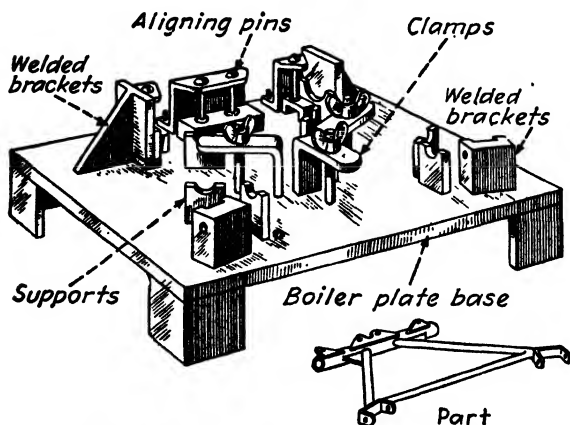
One of many fixtures for holding tubing to be welded into subassemblies. The part is shown below the base of the fixture.
